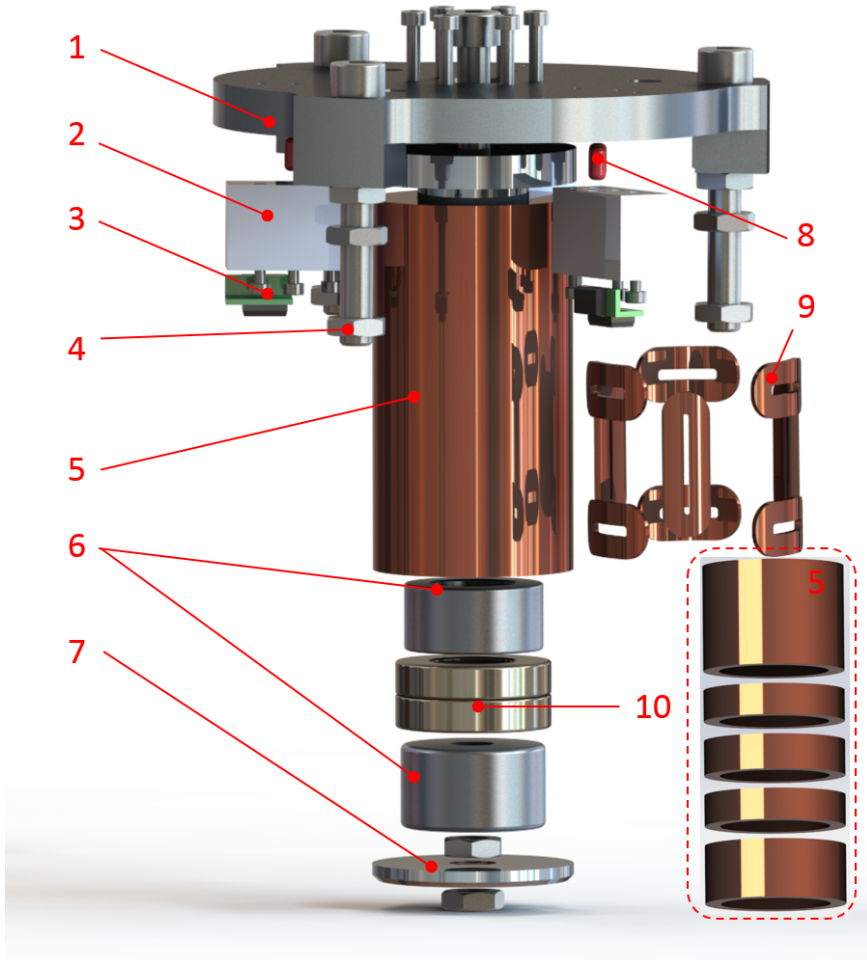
Exploded view of the mechanical design of the stator. 1: base to be mounted on the robot arm, 2: mounting blocks for 2-DoF sensors, 3: 2-DoF proximity sensors, 4: mechanical stoppers, 5: segmented copper tube with stator magnets inside and coils outside, 6: aluminium spacers, 7: end cap, 8: alignment pins, 9: coils, 10: stator magnets. (Figure courtesy of Yanyang Wang [45])
